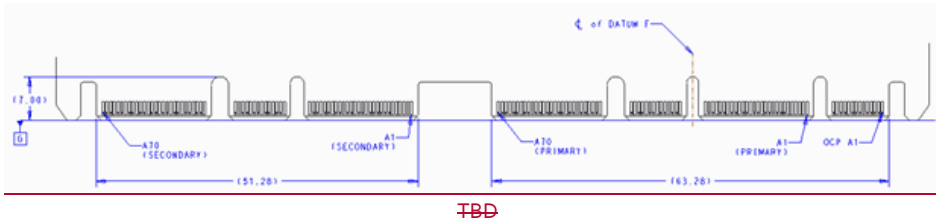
Large Size Card Gold Finger Mating Card Dimensions – x32 – Bottom Side (“A” Pins)
